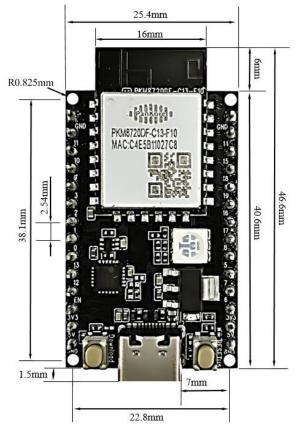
PKE8720DF-C13-F10 Board Dimensions
